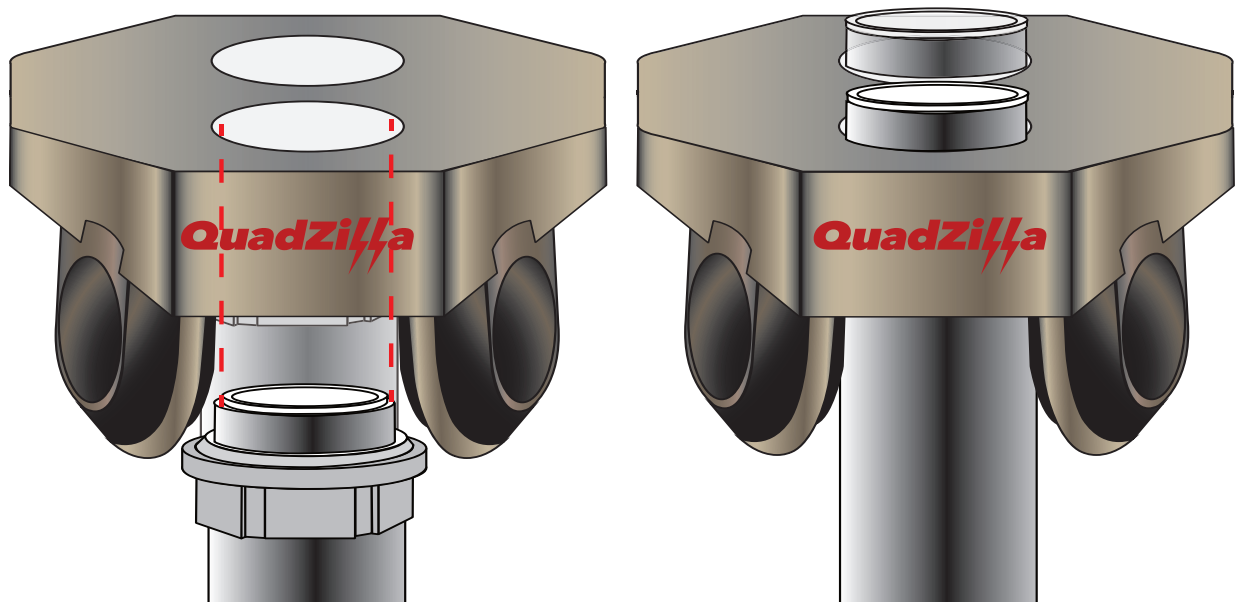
Attaching the QuadZilla Cable Management Assembly Onto the Pole
